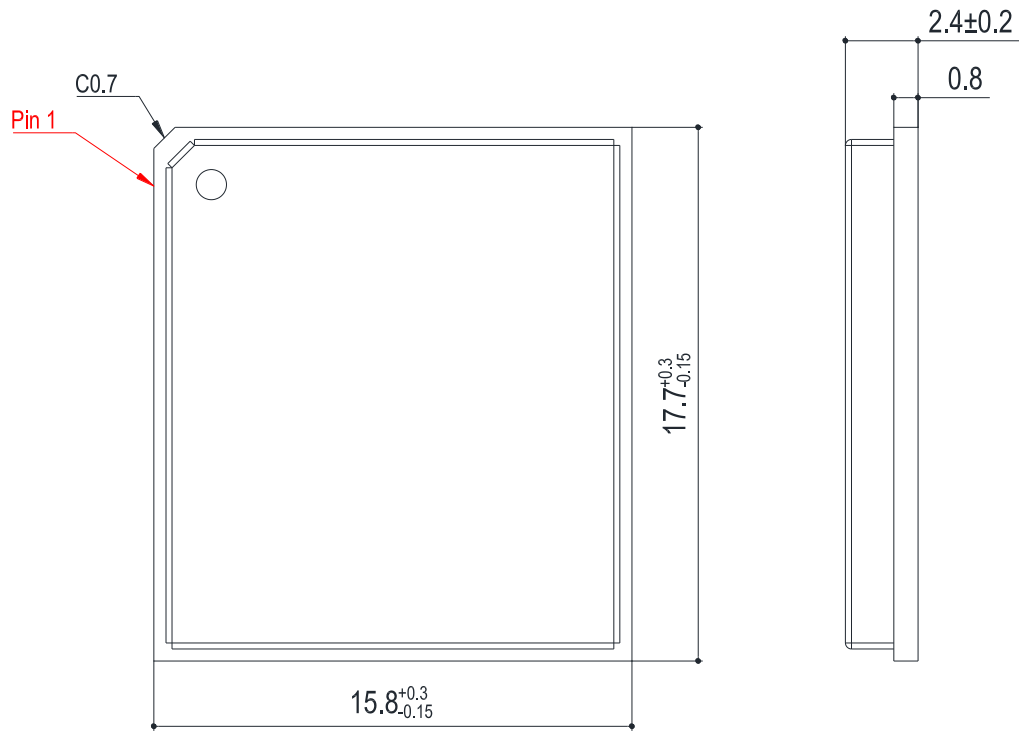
Top and Side Dimensions of EG800K Series (Unit: mm)
